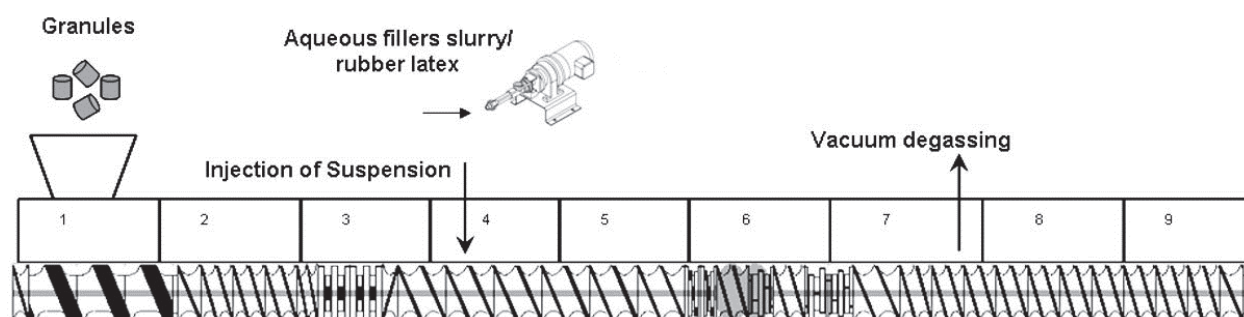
Screw configuration and barrel sections of the co-rotating twin-screw extruder.
